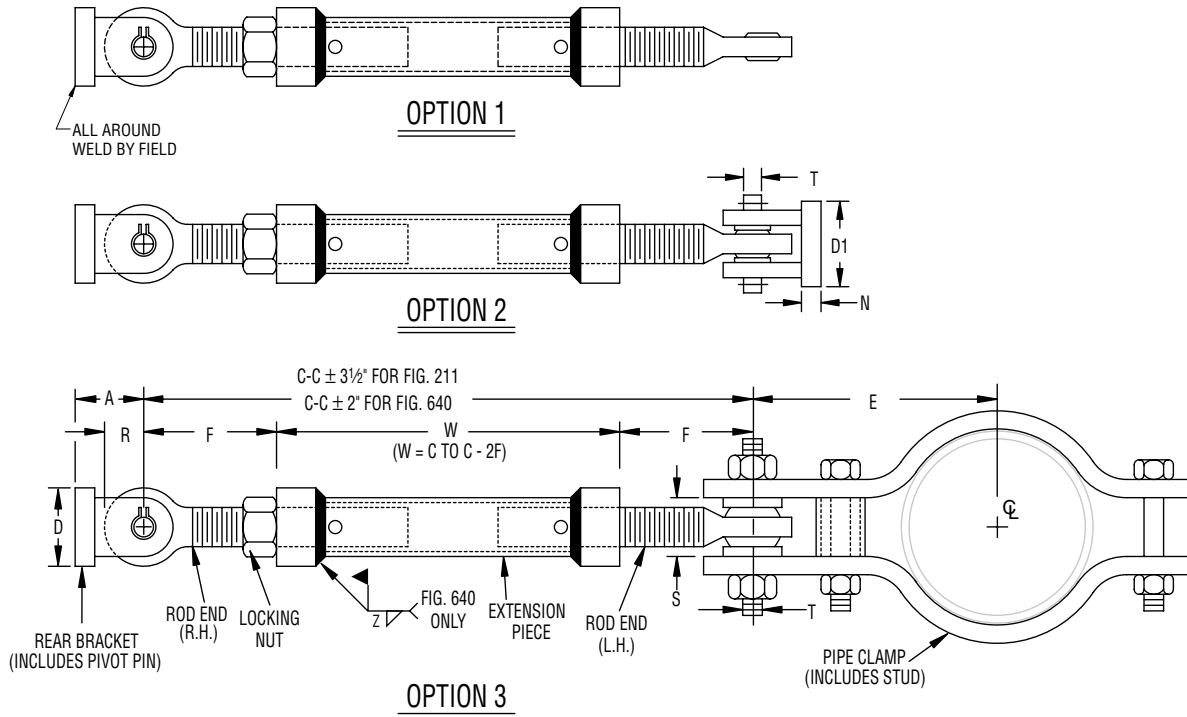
, C-211, FIG. 640 & FIG. C-640: LOAD (LBS) • DIMENSIONS (IN)
